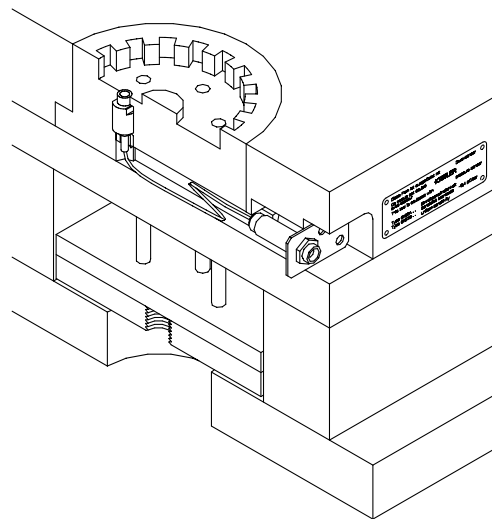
Sensor, cable, mounting plate (Art. No. 3.520.328) and identification label (Art. No. 3.520.899)
